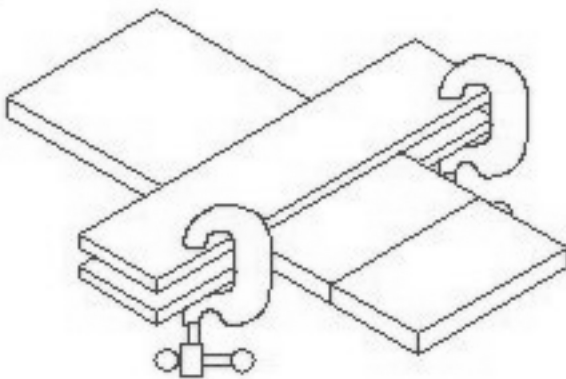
Acrylic Sheet cut, Using a Hand Saw
